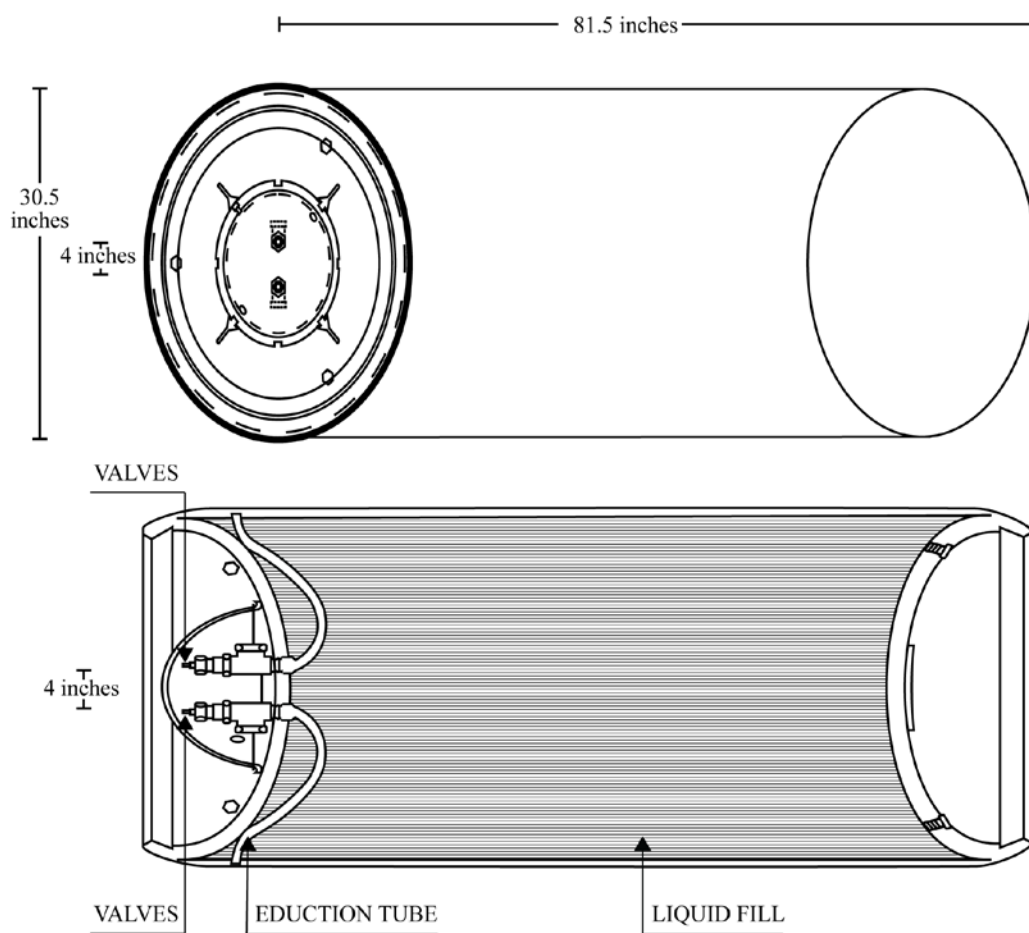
Container, Bulk, One-ton, Type A - Line Drawing
